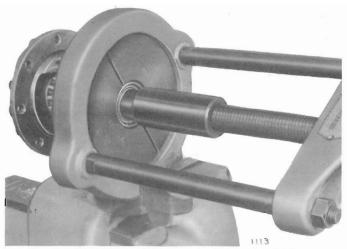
Using Churchill press and adaptor ring \$102 to remove the crown wheel carrier bearings
